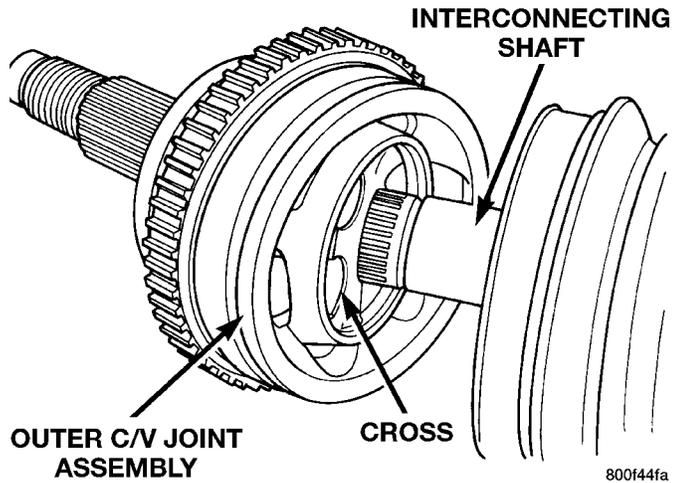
Outer C/V Joint Correctly Installed on Interconnecting Shaft
